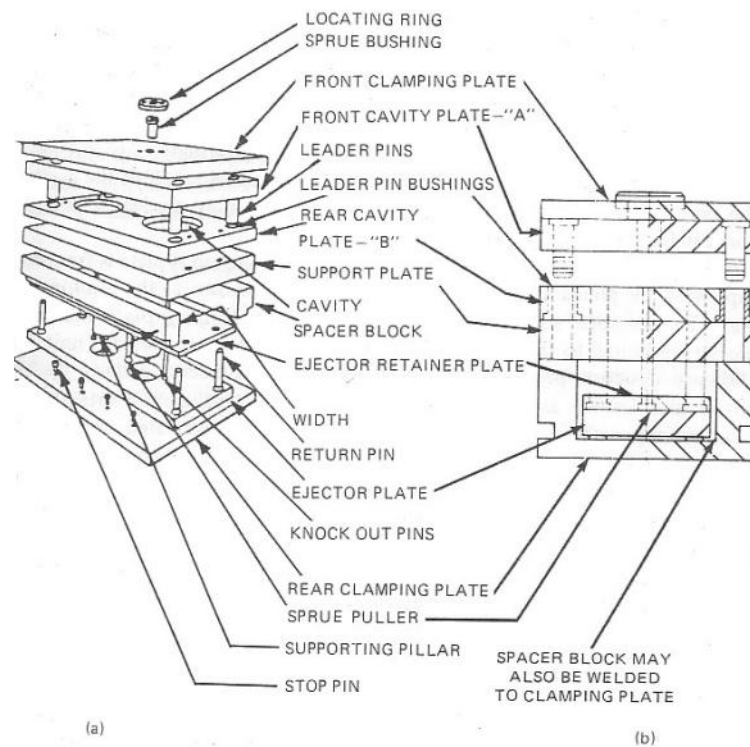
a, Exploded view of mold base. b, Cross section of mold base.
